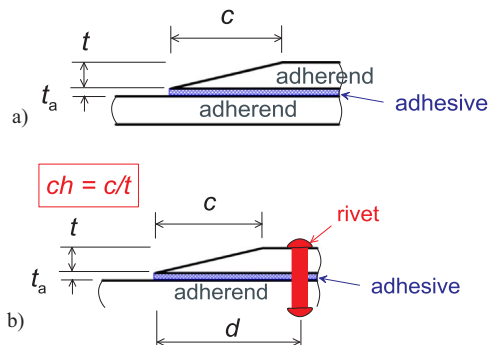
Chamfer geometry described by geometric parameter “ $ch$ ” for a) purely adhesive joint, b) hybrid joint produced by adhesive bonding and riveting.
